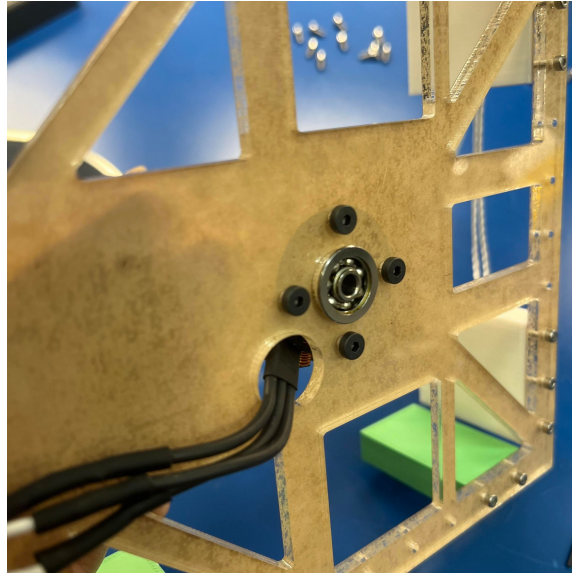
Mount the stator to the acrylic plate. Route the stator mounting wires through the cutout as shown in the picture
